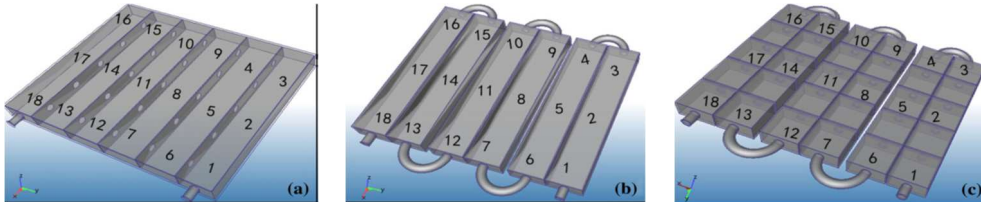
TECs (a) plate (b) Stripe (c) diamond shaped in three dimensions, reprint with permission.
